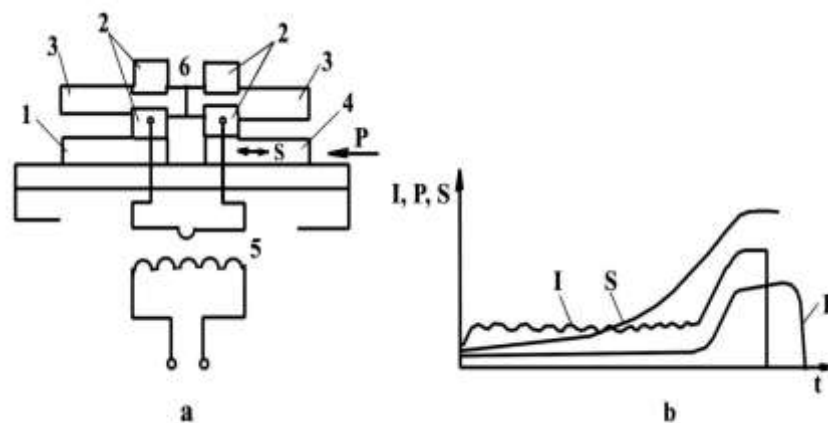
Scheme of flash welding (a) and welding cycle (b):
